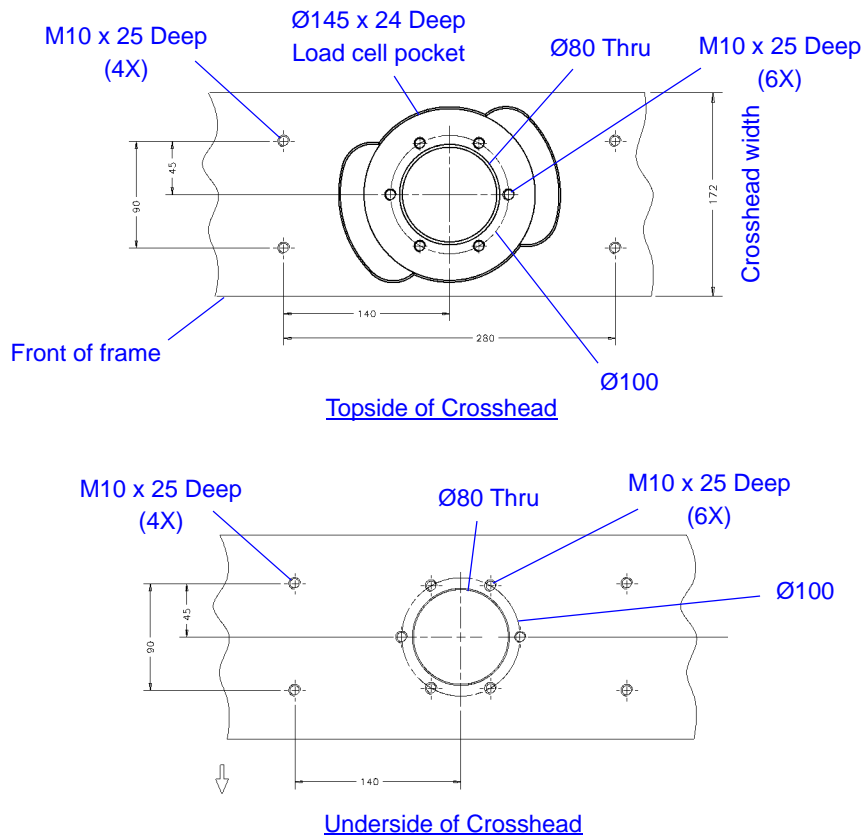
Series 5581 and 5582 Second Test Space Configuration - Fixed Crosshead Mounting Dimensions
